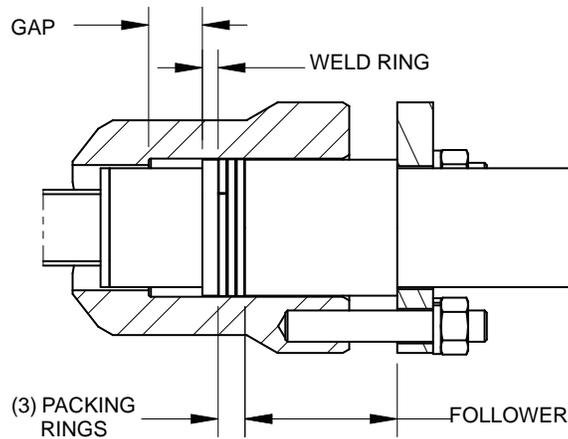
shows a view of the Pak-lok Annubar when installation is completed. Please note that there should be a gap between the Pak-lok Body and the Weld Ring.
